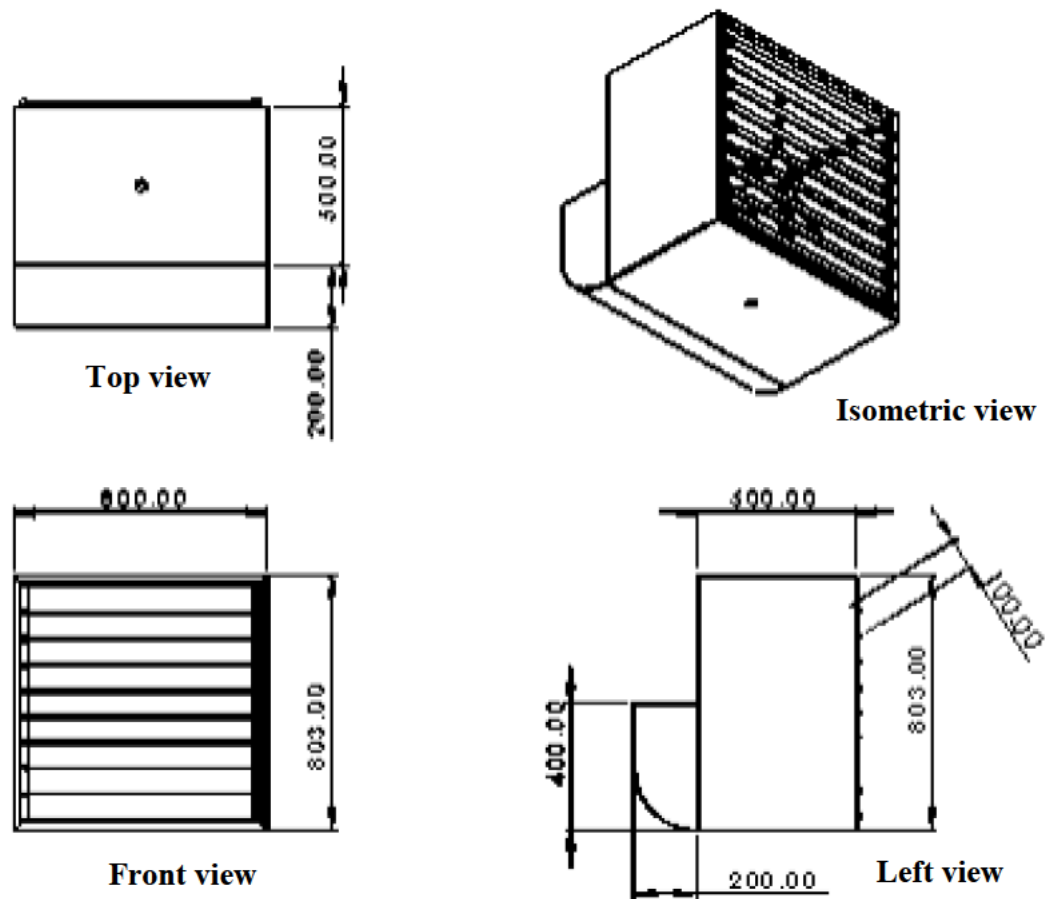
Top, front, left, and isometric view of the wind turbine design
